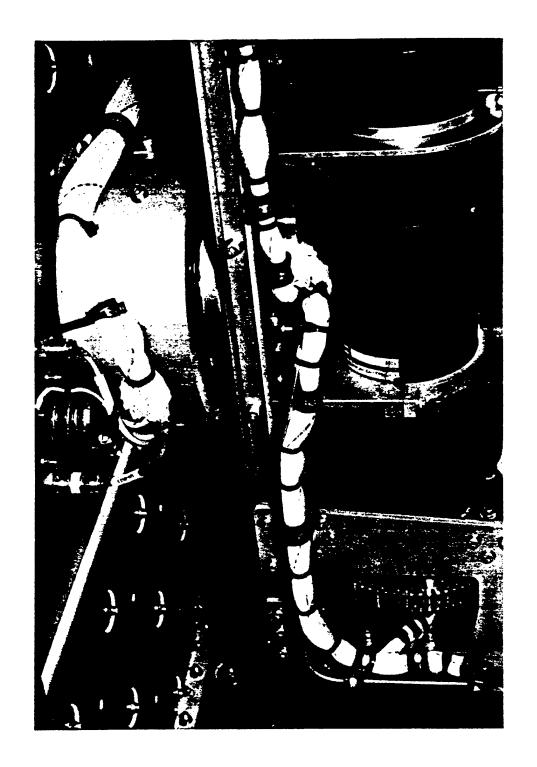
Close up photo of the PSR yoke and upper azimuthal bearing assembly illustrating part of the gimbal scanning mechanism. The elevation scan motor and elevation drive gear are shown.
